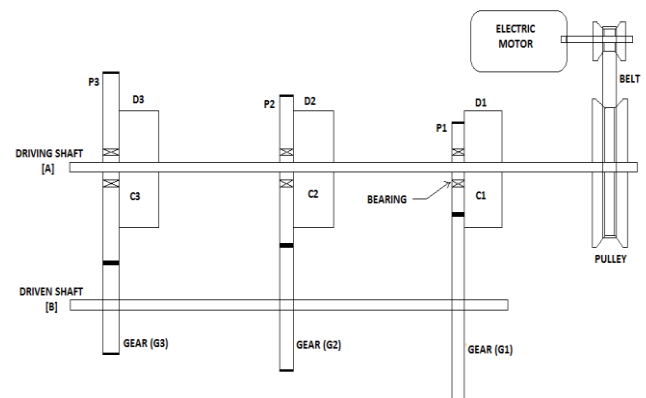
Schematic diagram of Automatic Gearbox with centrifugal clutches.
